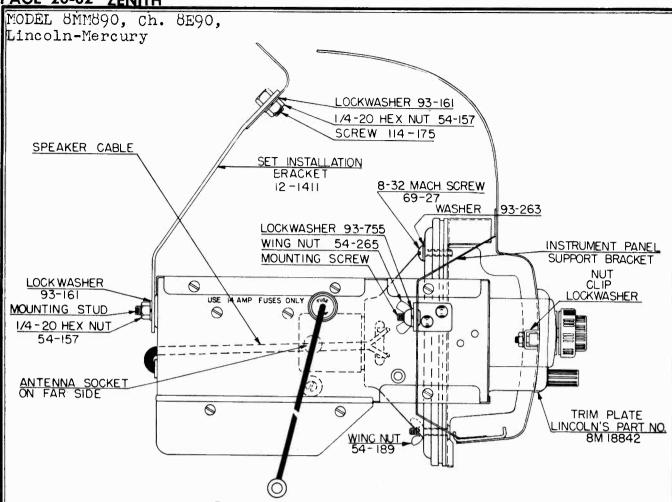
Set Installed, Cut Away View RECEIVER INSTALLATIONS
